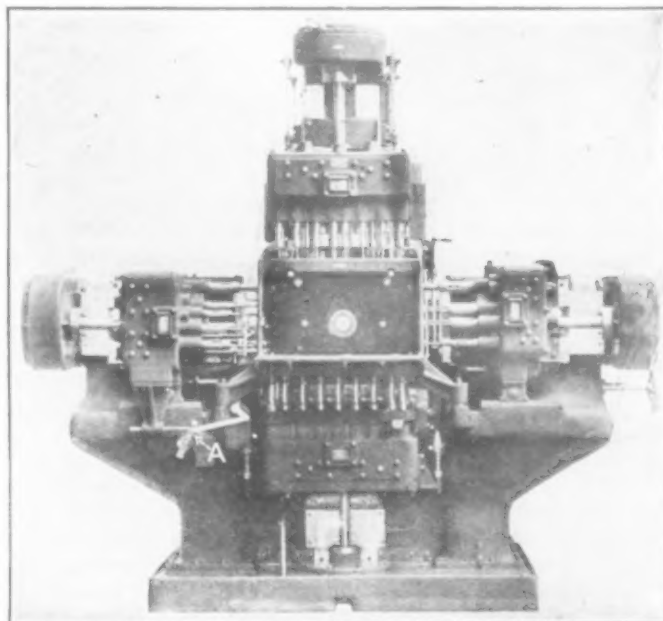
LATEST MODEL OF FOOTE-BURT FOUR-WAY DRILLING MACHINE
